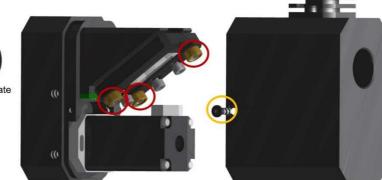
Disassembly of EO Attenuator. Adjustment microscrews circled in red. To remove the cover loosen two screws on each side of EO Attenuator (marked with yellow circle)
